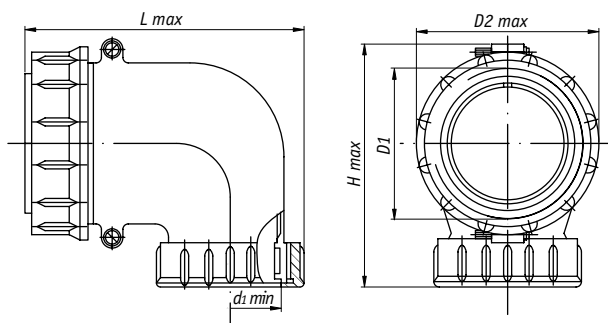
Cable connector plugs and sockets (KUEA) with elbow pipe and nut for shielded cable
